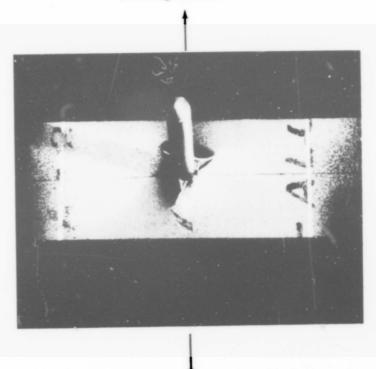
Crack Arrest Behavior of a 12-Inch by 0.032-Inch 7075-T6 Bare Panel With One 4-Inch by 0.010-Inch Fiberglass Strap on Impact Side of Specimen.
